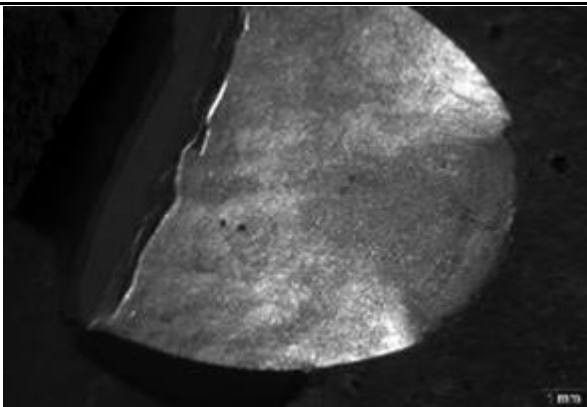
Cup and Cone fracture showing failure of the alloy at 200KPa
